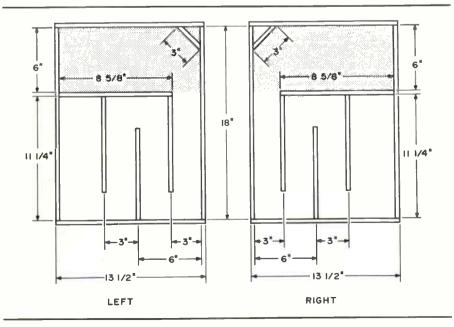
Internal details and dimensions of the TL-5 are shown with front baffle removed.
